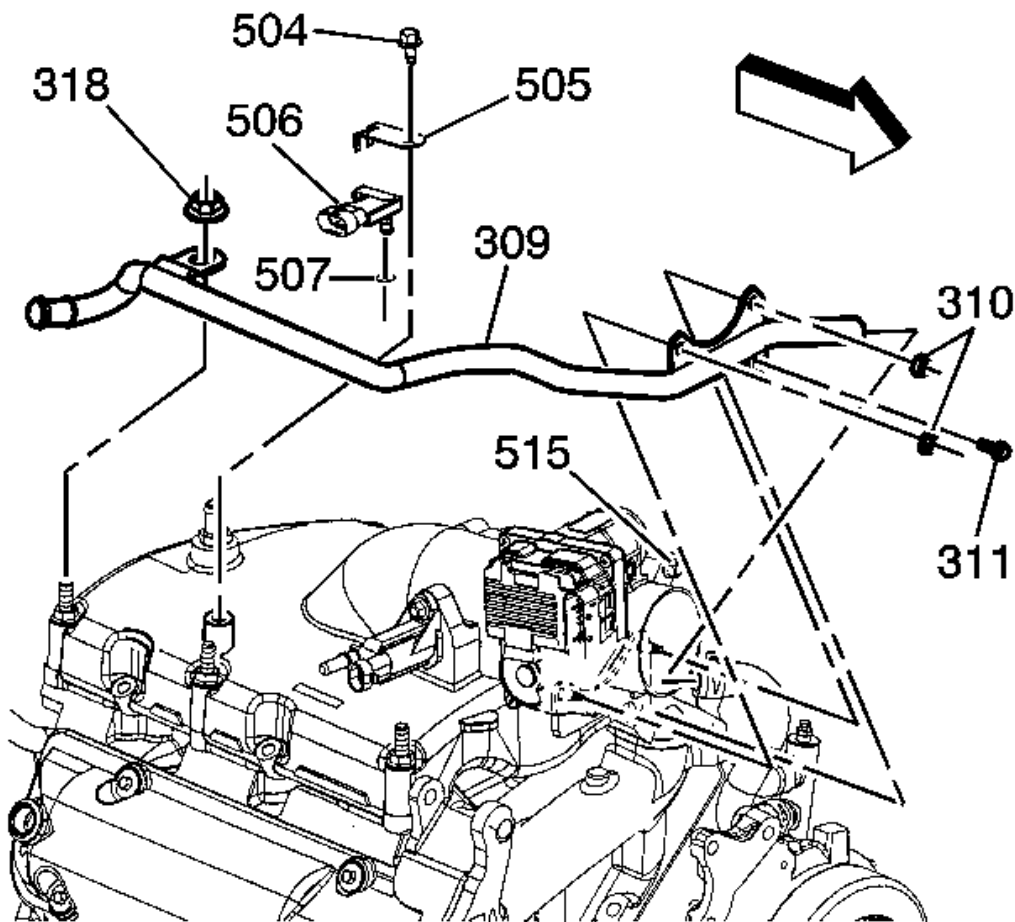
View Of MAP Sensor & Heater Outlet Pipe
